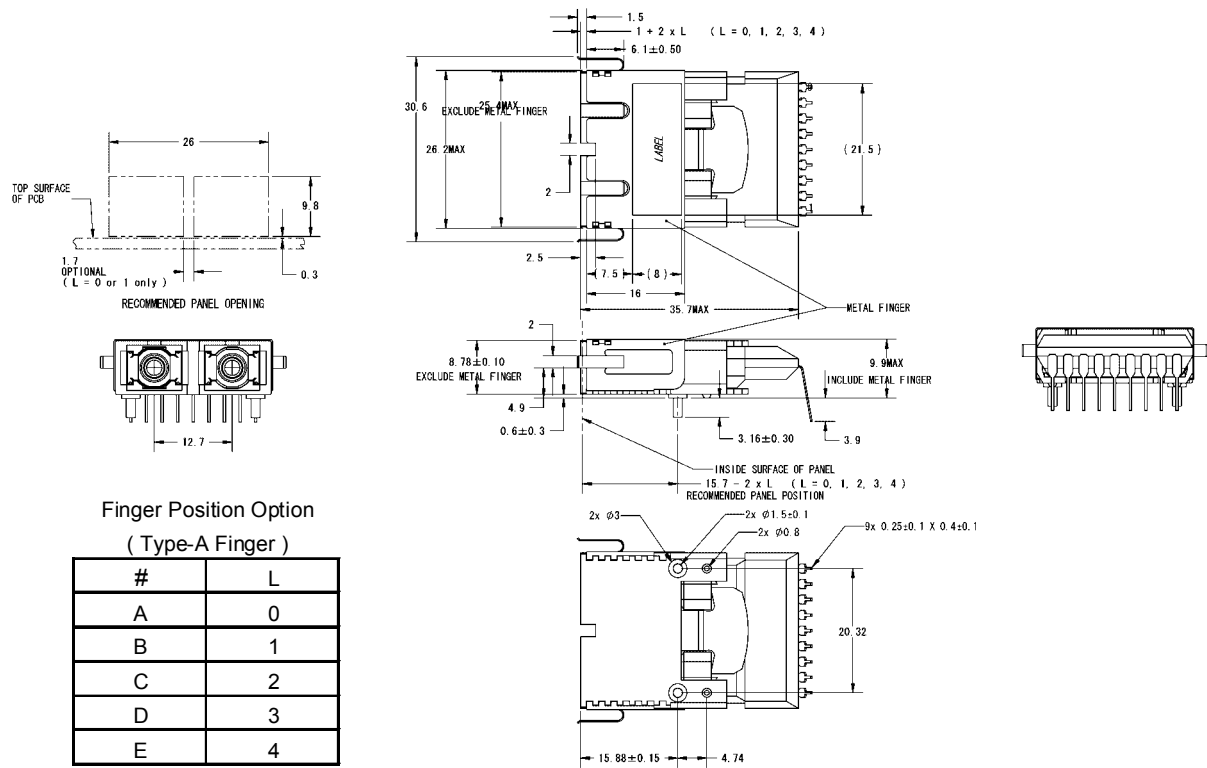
Outline Dimensions (SCM7104-GC-#N)
